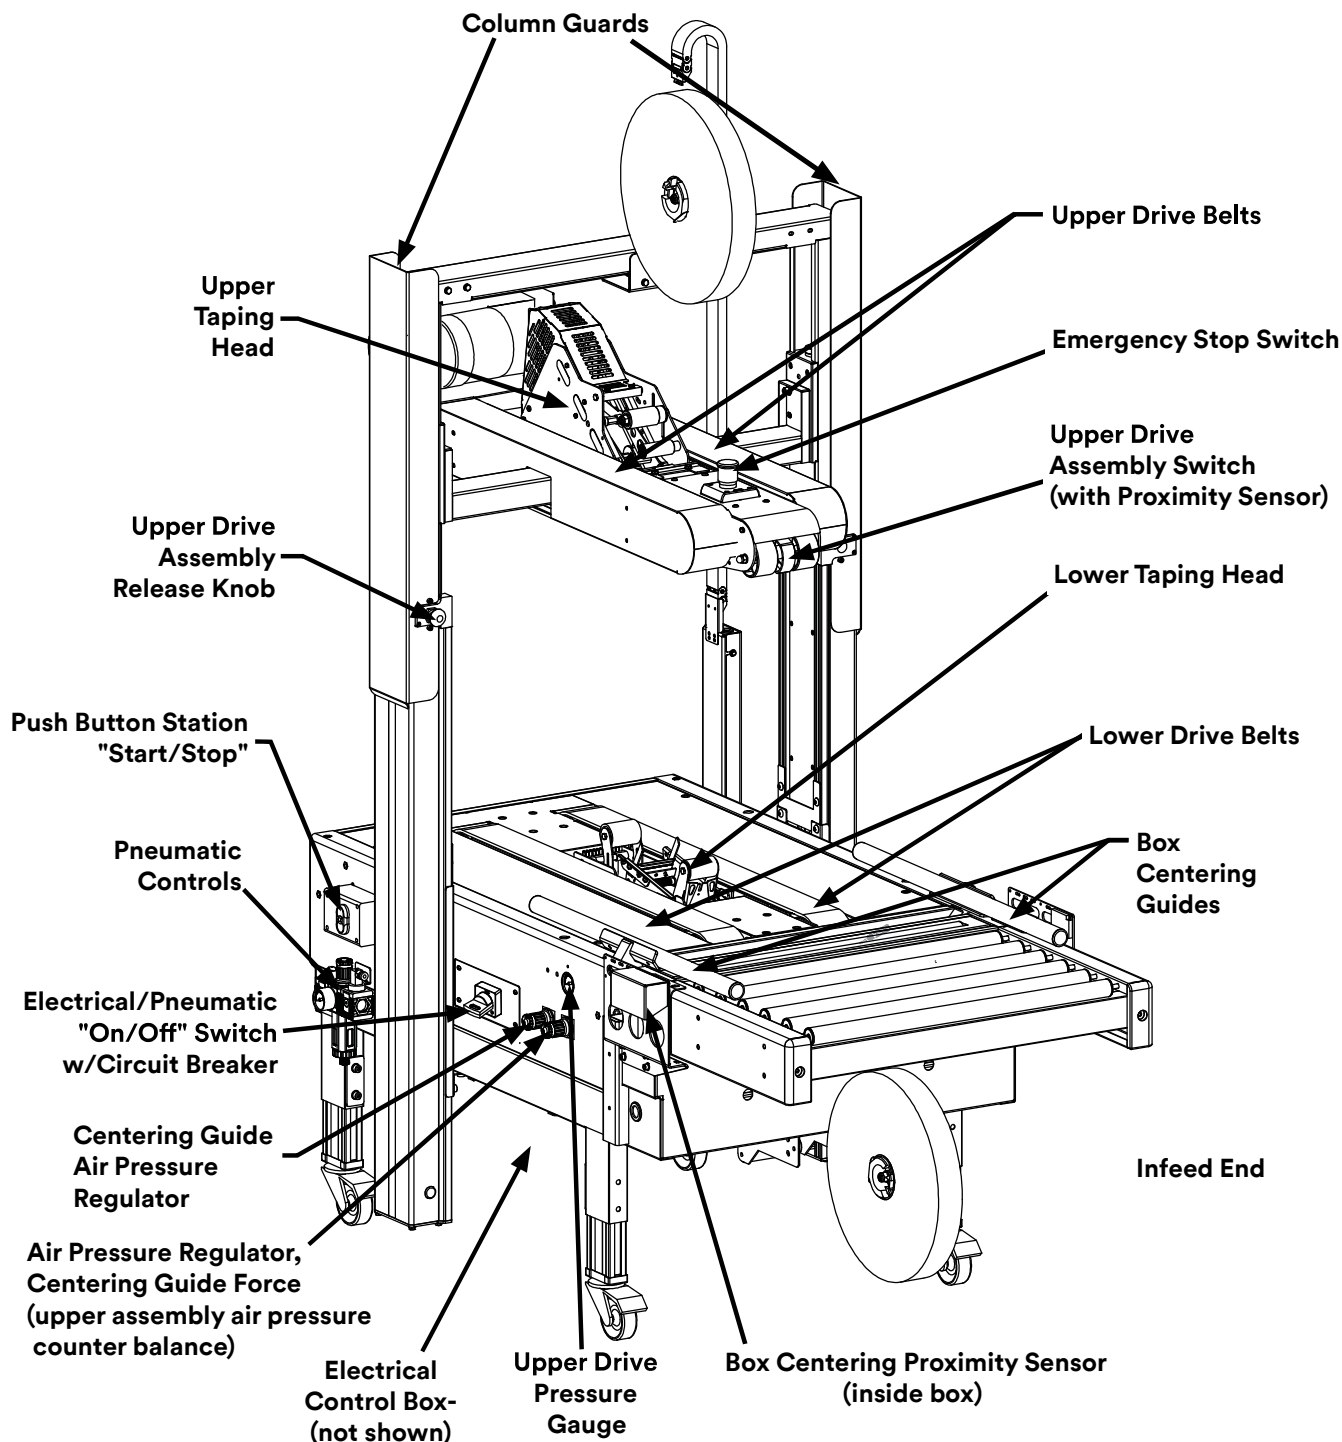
7000r-I / 7000r3-I Case Sealer Components (Left Front View)
